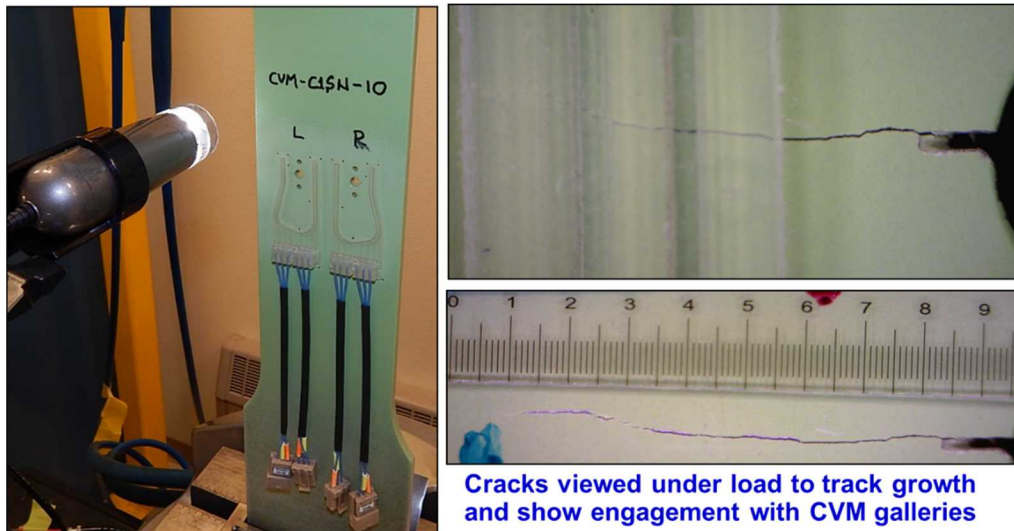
S-92 Gusset Frame Fatigue Test Specimen with CVM Sensor Installed and Close-Up Showing Fatigue Crack Crossing into CVM Sensor Galleries
